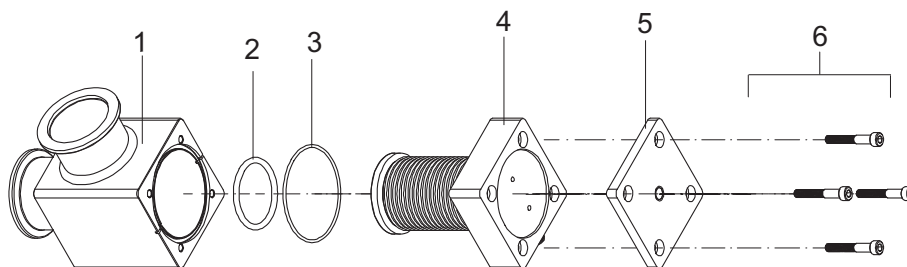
Remove and clean O-rings electropneumatic angle valve
